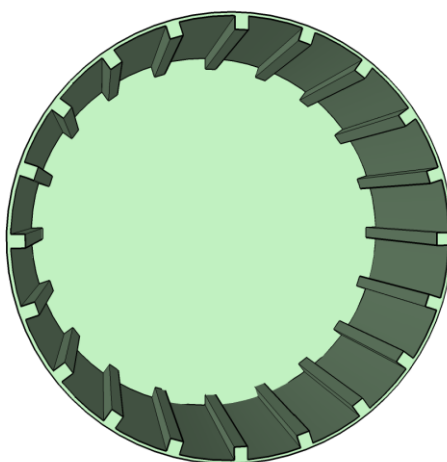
Internals of the 60 cm diameter mill used for SAG batch grinding tests
